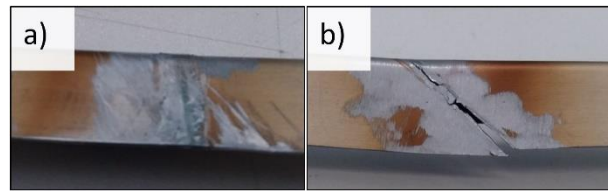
Roll formed aluminium profile a) at butt joint soldered region b) at scarf joint soldered region
